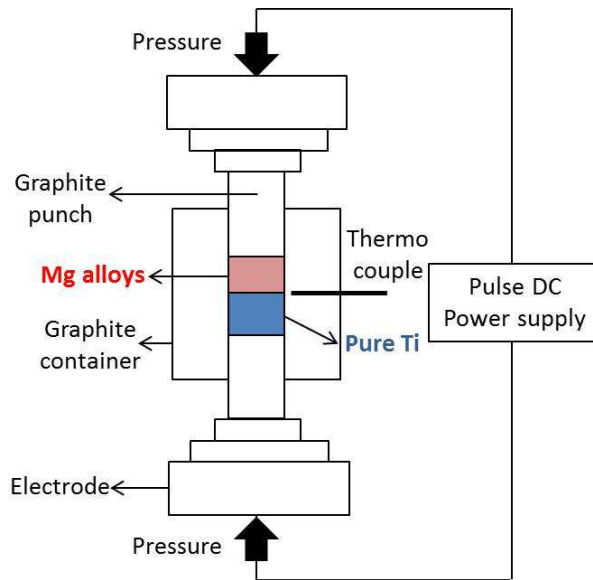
Schematic drawing of components arrangement inside a SPS chamber.
